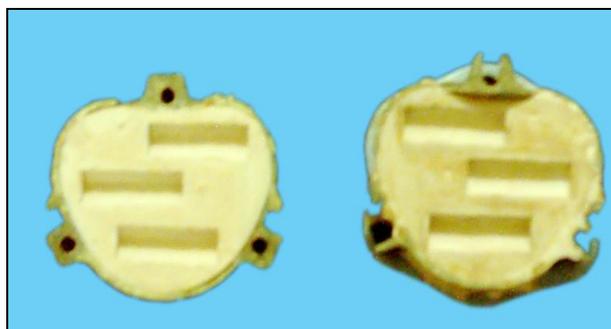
Mould Used in Preparing Tensile Test Specimen.
